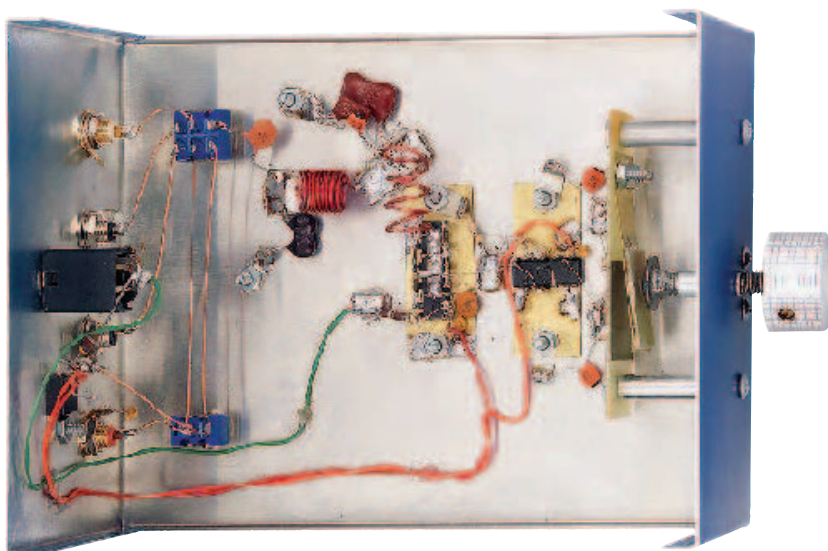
Inside view of transmitter. Note the small pieces of printed circuit board material used to mount the parts "Manhattan" style. Parts mounted on the rear panel (from top to bottom): phono jack for the antenna, phono jack for receiver antenna, key jack, phono jack for receiver power and partly hidden R6, U3, C10 and phono jack for power. S2 and S1 (the blue objects) are to the right. Moving farther to the right, components are C9, C8, L3 and several paralleled capacitors that comprise C7. Still farther to the right: the stretched out L2, U2 (mounted on a piece of brass), R4, C5, R5 and C6. U1 is mounted on the next piece of brass. R3, R2 and C4 are wired to U1. Next come C3, R1, L1 and C1, all mounted "Manhattan" style. The crystal is glued to the back of the compression capacitor and blocked from view.
